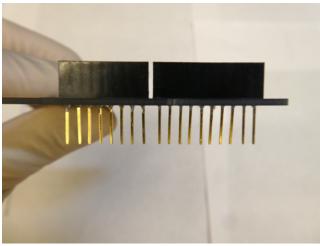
Side view of a finished solder work. Notice that the stacking pins are flush with the shield.
